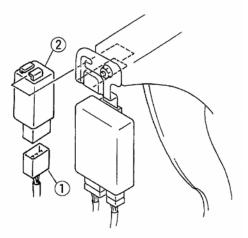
Inspecting Door Lock Switch Connector Terminals Courtesy of MAZDA MOTORS CORP.
